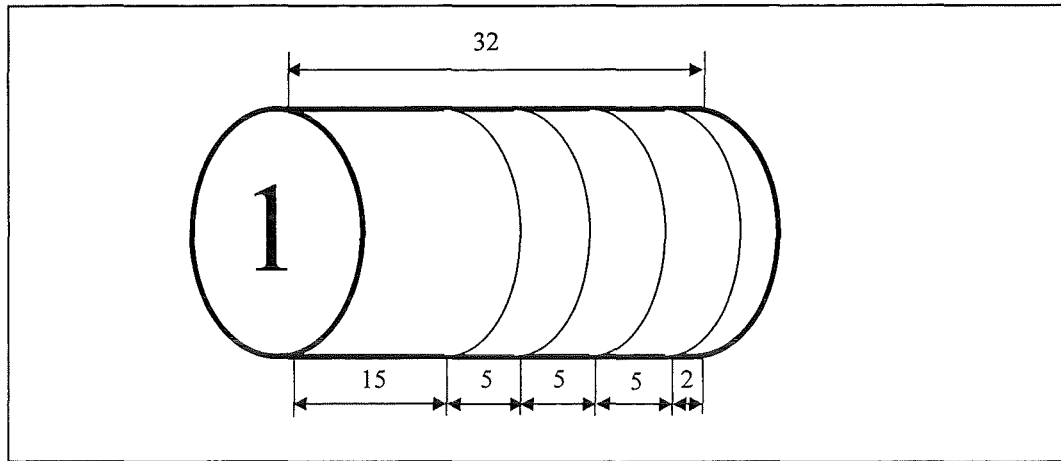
Cutting of specimen no. 1 into five segments for subsequent measurements.
